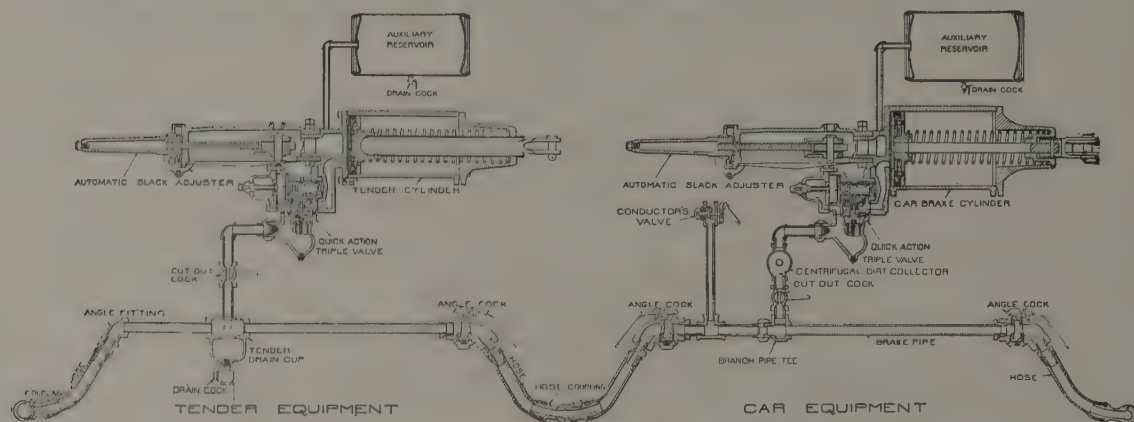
Diagram of Westinghouse Old Standard Quick Action Air Brake Apparatus for Passenger Train Cars.
